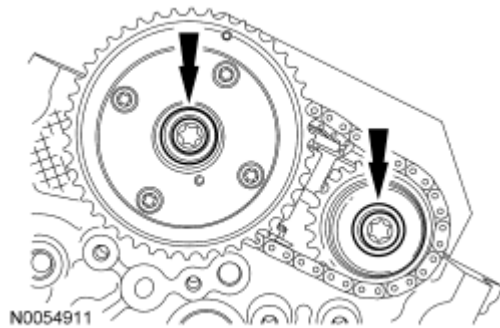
Locating LH VCT Assembly Bolt & LH Exhaust Camshaft Sprocket Bolt
